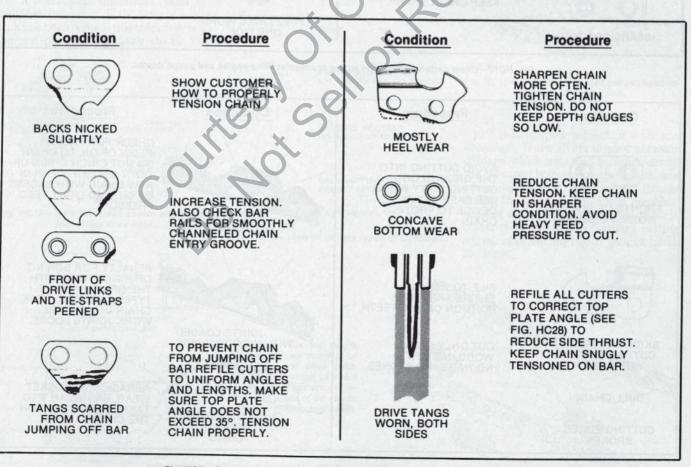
Chain patterns caused by wrong tension or improper chain filing.
